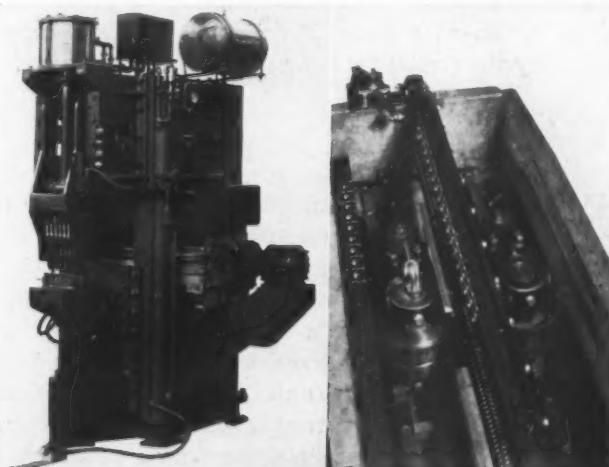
Rapid succession of clean, strong spot welds is made possible by motor-driven rolling switch
